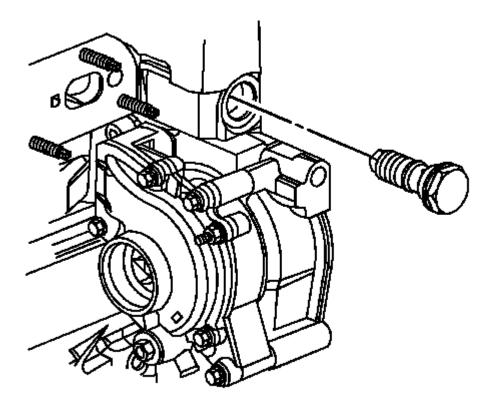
View Of Upper Timing Chain Guide Bolts And Guide Courtesy of GENERAL MOTORS CORP.
